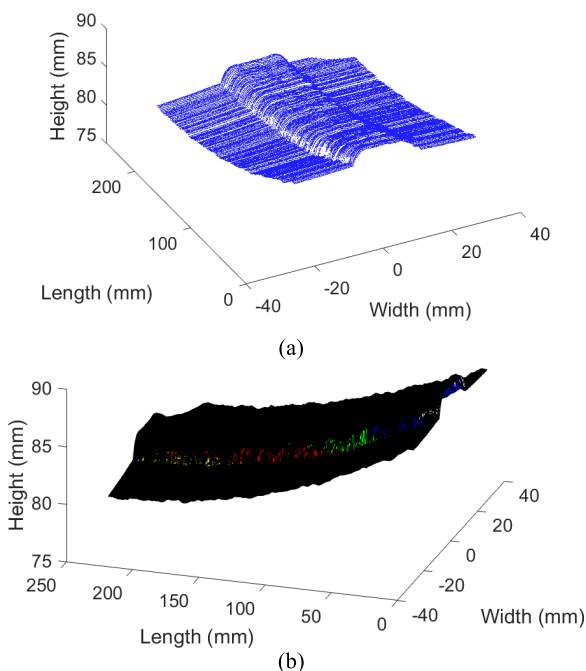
Experimental measurement data of helical seam weld beads to be removed at steel pipe end. (a) 3D weld bead profiles. (b) 3D weld bead surface.
